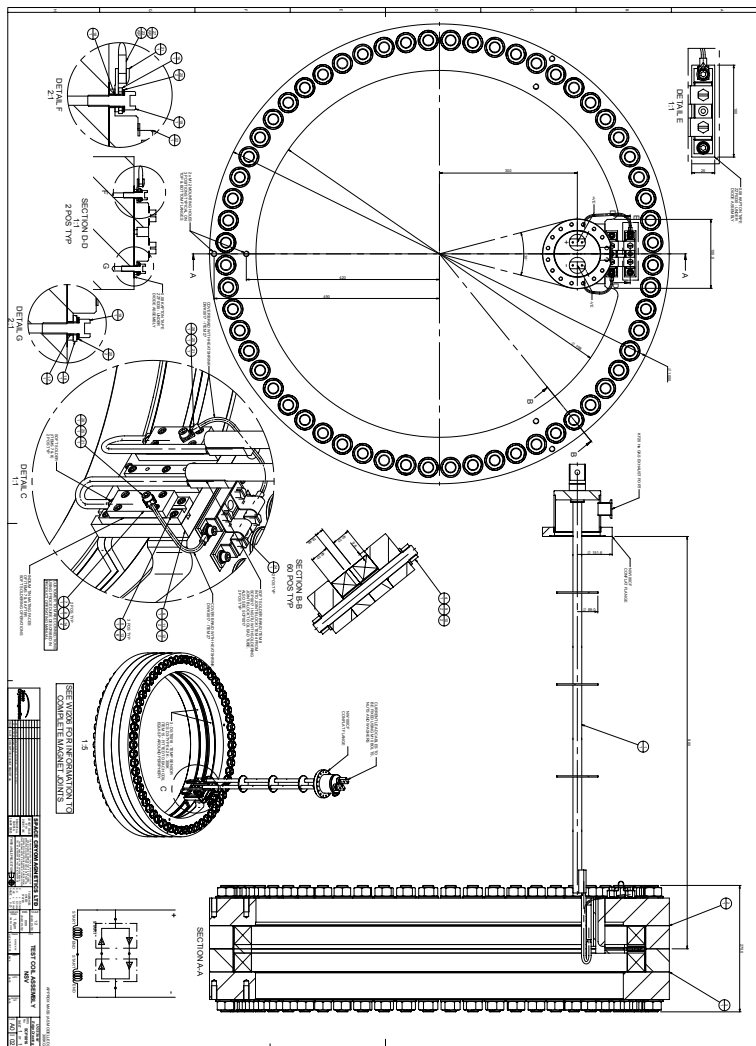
Technical drawing of the prototype coil. [Sci08]
